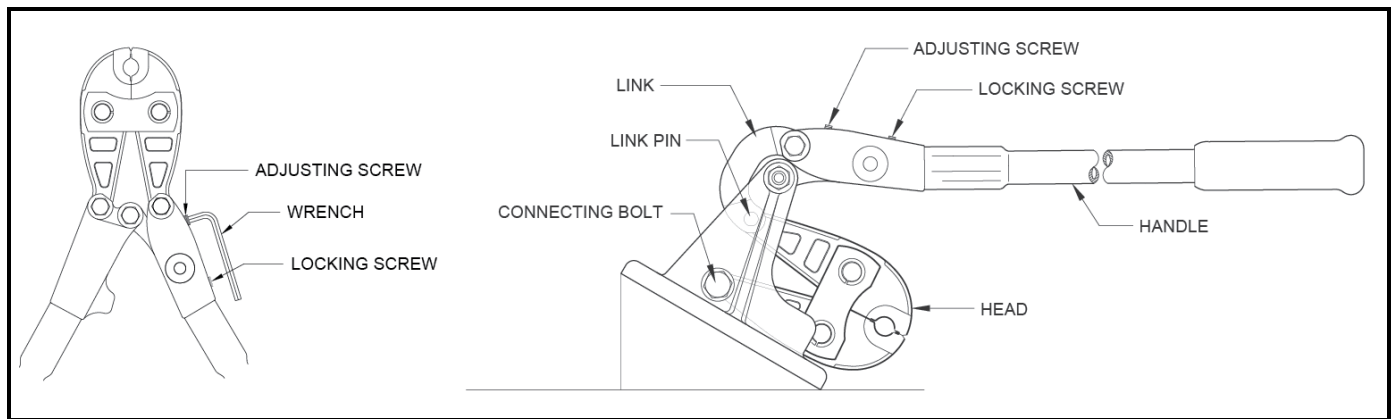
Hand tool (left) or bench tool (right) can be used to crimp a compression sleeve
